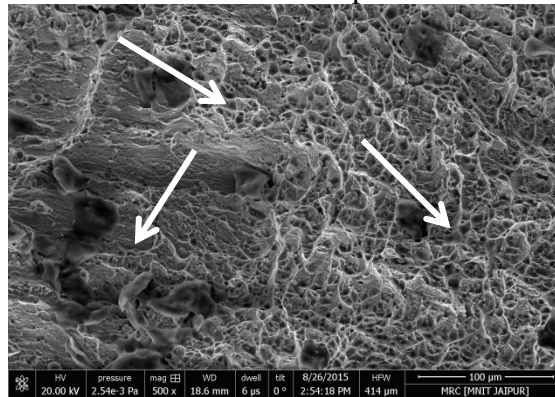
SEM fractographs for 10 wt.-% of MD particulate filled SiBr alloy composites after fracture test
